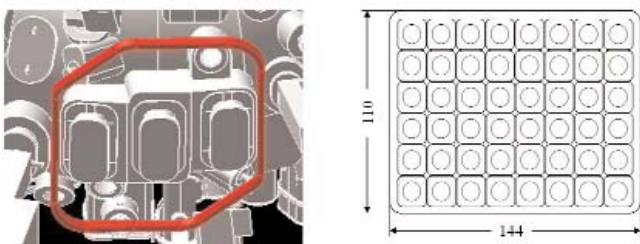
Trim coil type 1, layout on outer vessel and winding pack cross section
